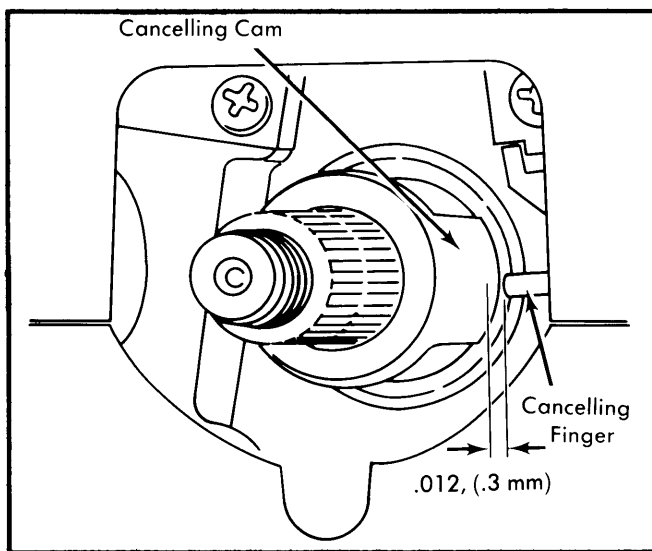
Cancelling Cam and Finger with Clearance Shown
